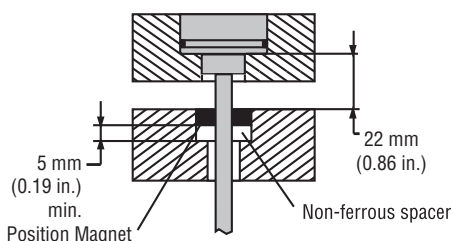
MH-Series Model MS rod-style sensor mechanical installation example
